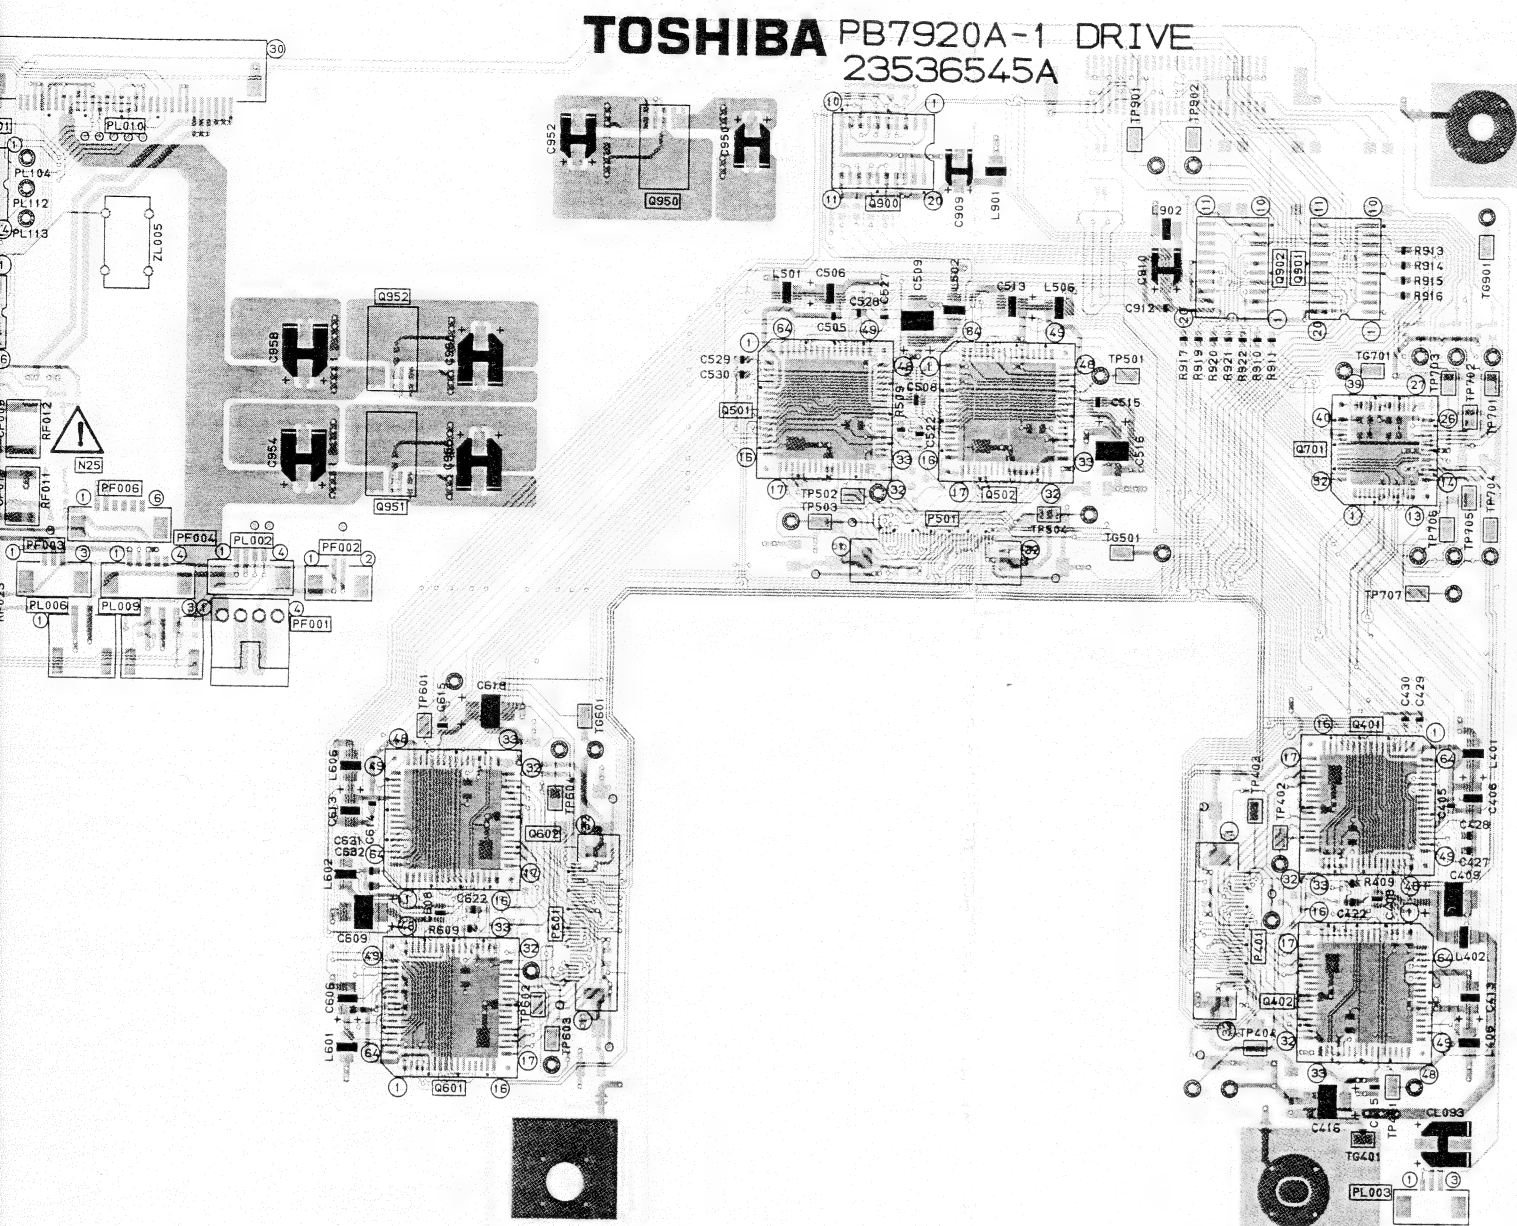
U0011 Drive PC Board (Top Side)
